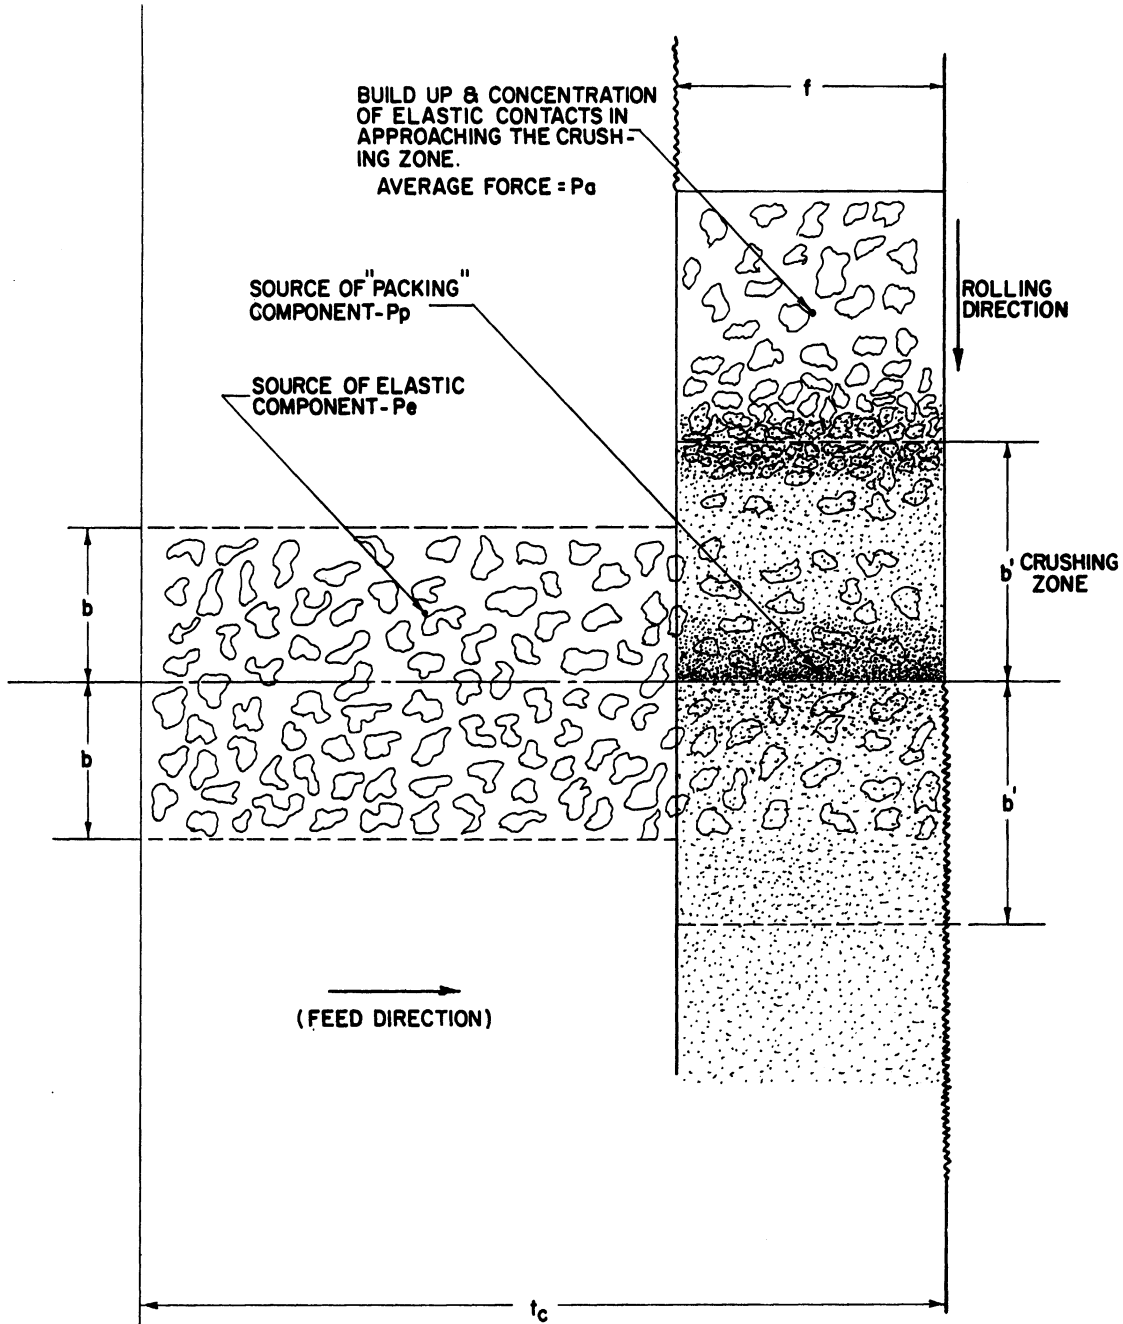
Front view of probable conditions in the contact zone between the crushing wheel and the grinding wheel. All grains make elastic contact since actual fracture is sudden and brittle in nature. All debris from crushing must pass between the wheels and can cause some packing at large depths of cut.
